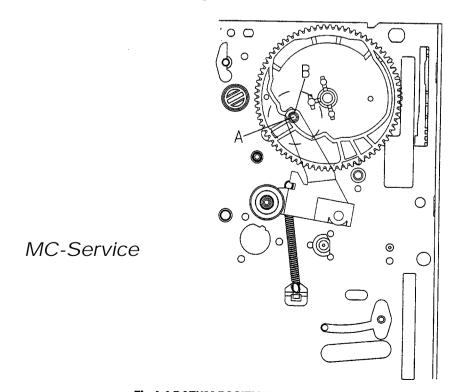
DATUM POSITION OF PINCH LEVER TOTAL ASS'Y & CAM GEAR
